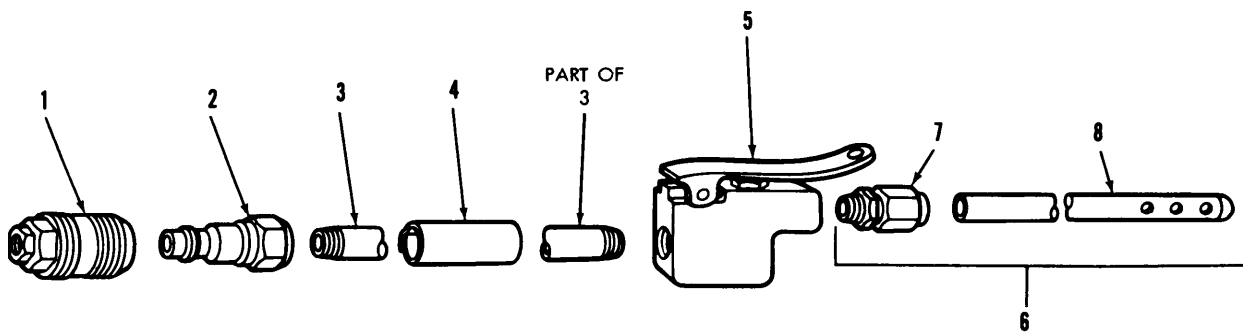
V-PACK CLEANER ASSEMBLY COMPONENTS.
